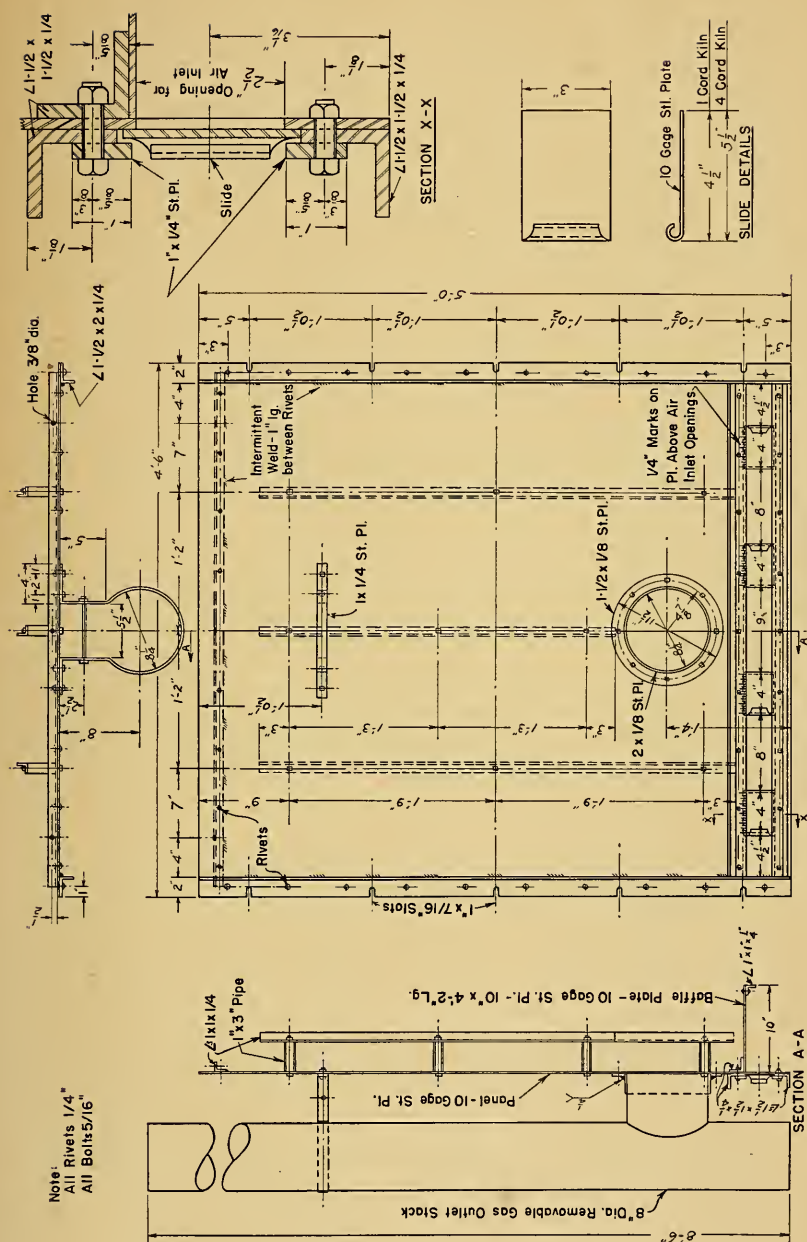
One cord kiln. Front end panel, gas outlet stack and details of air inlet slide construction.
